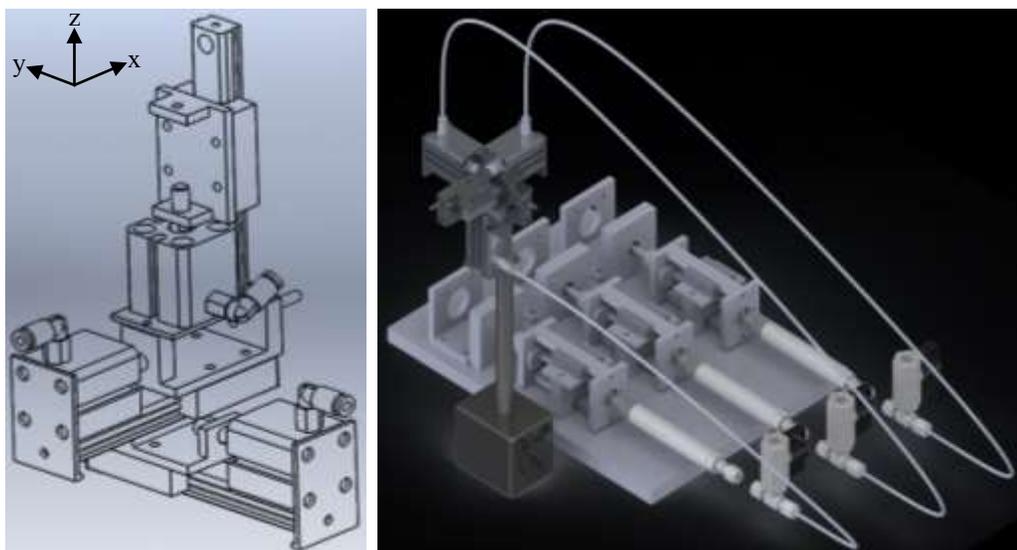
CAD model of manipulator system, with a system assembly drawing using the old mounting configuration
